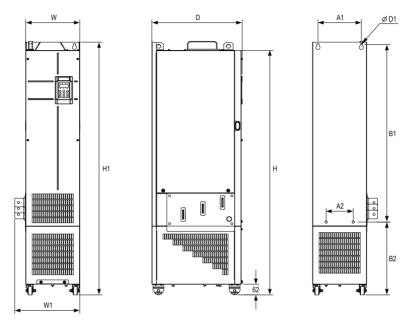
Overall and mounting dimensions of MD290T200G-L to MD290T450G-L and MD290T220P-L to MD290T500P-L
